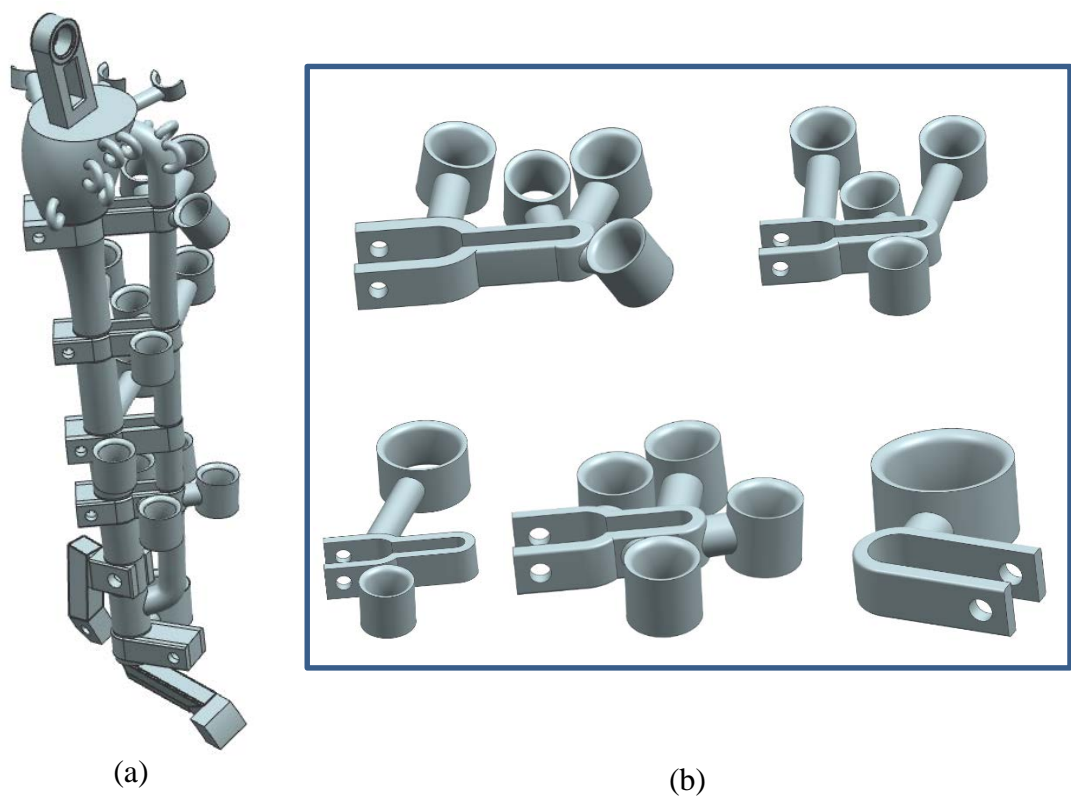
Assembly of (a) left shank and (b) extra components.
